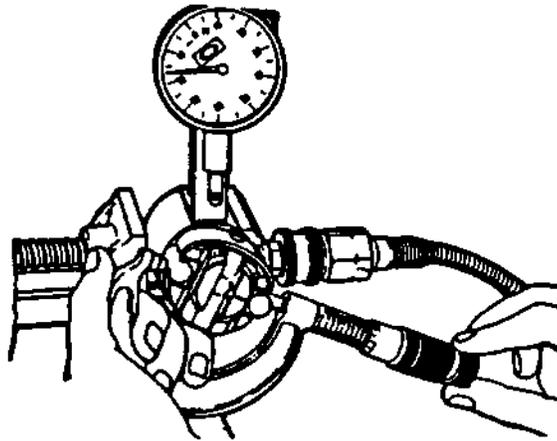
Measuring Roller-To-Roller Dimension
